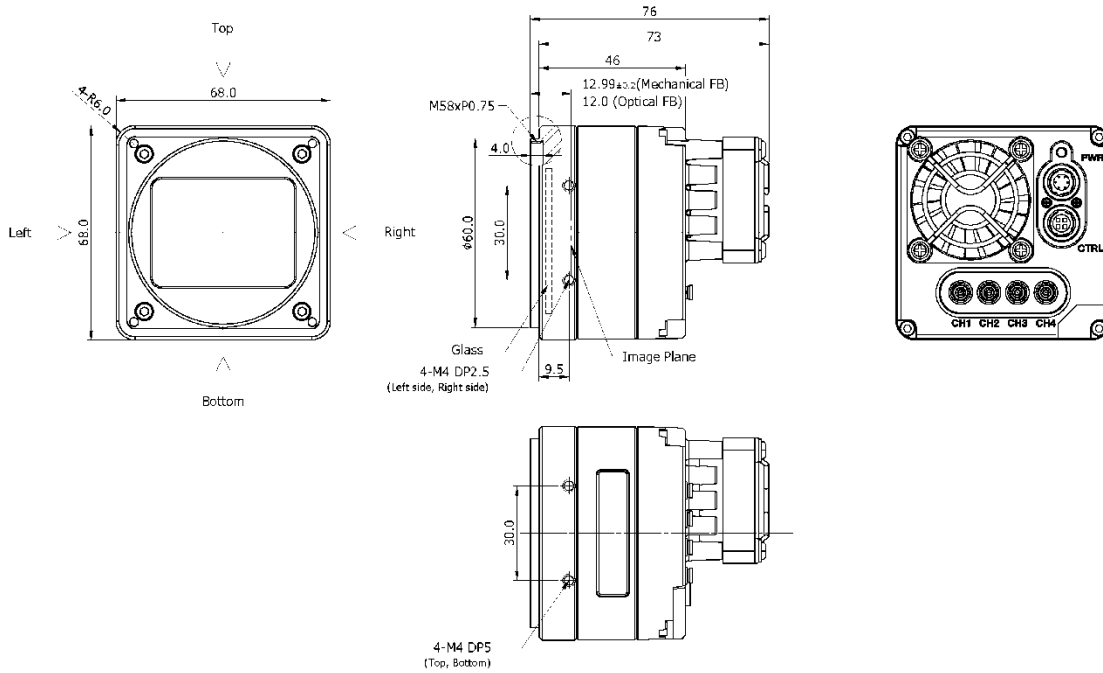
Mechanical Dimension of the VC-51MX2 FAN model
